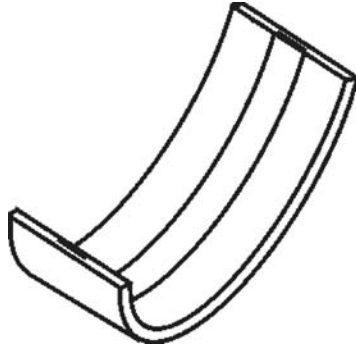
Appearance of bearing rillen (grooves), loss of overlay and embedded particles at the end of normal life of connecting rod bearings
